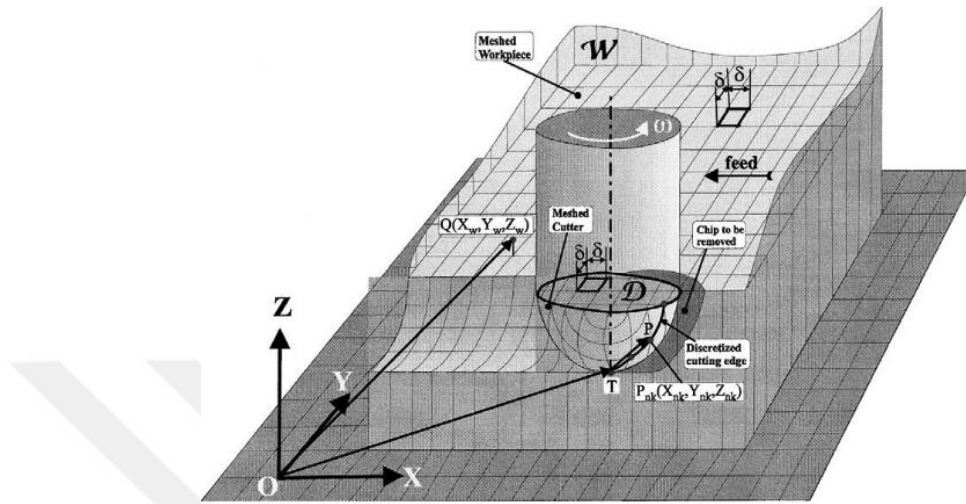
Illustration of meshed workpiece and cutter engagement domain [45]
